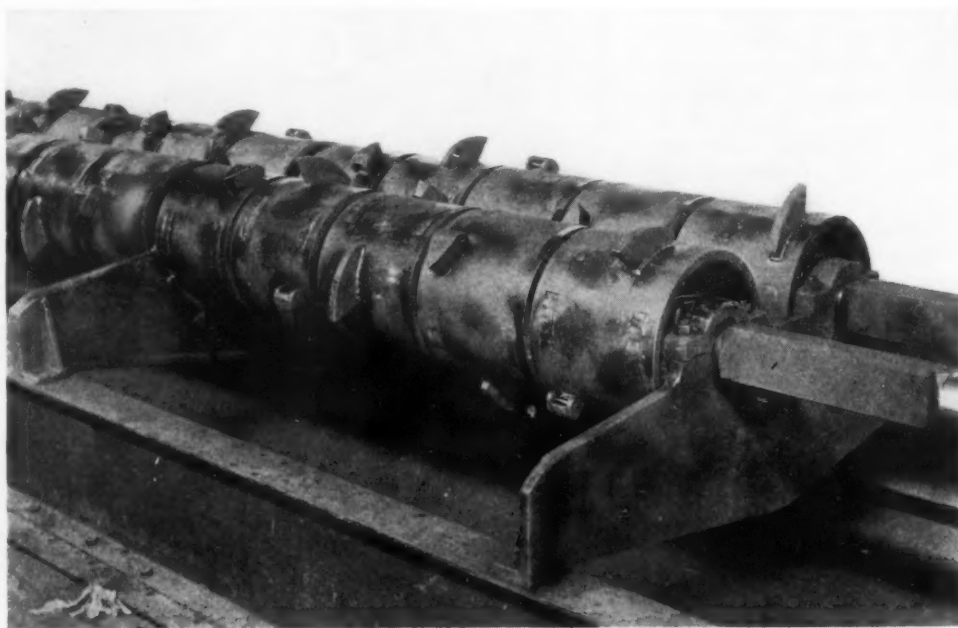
UNIFORM GRINDING IS MAINTAINED BY WELDING EXTRA LARGE TEETH TO STEEL SHELL AT CERTAIN POINTS TO ASSIST THE REGULAR TEETH
